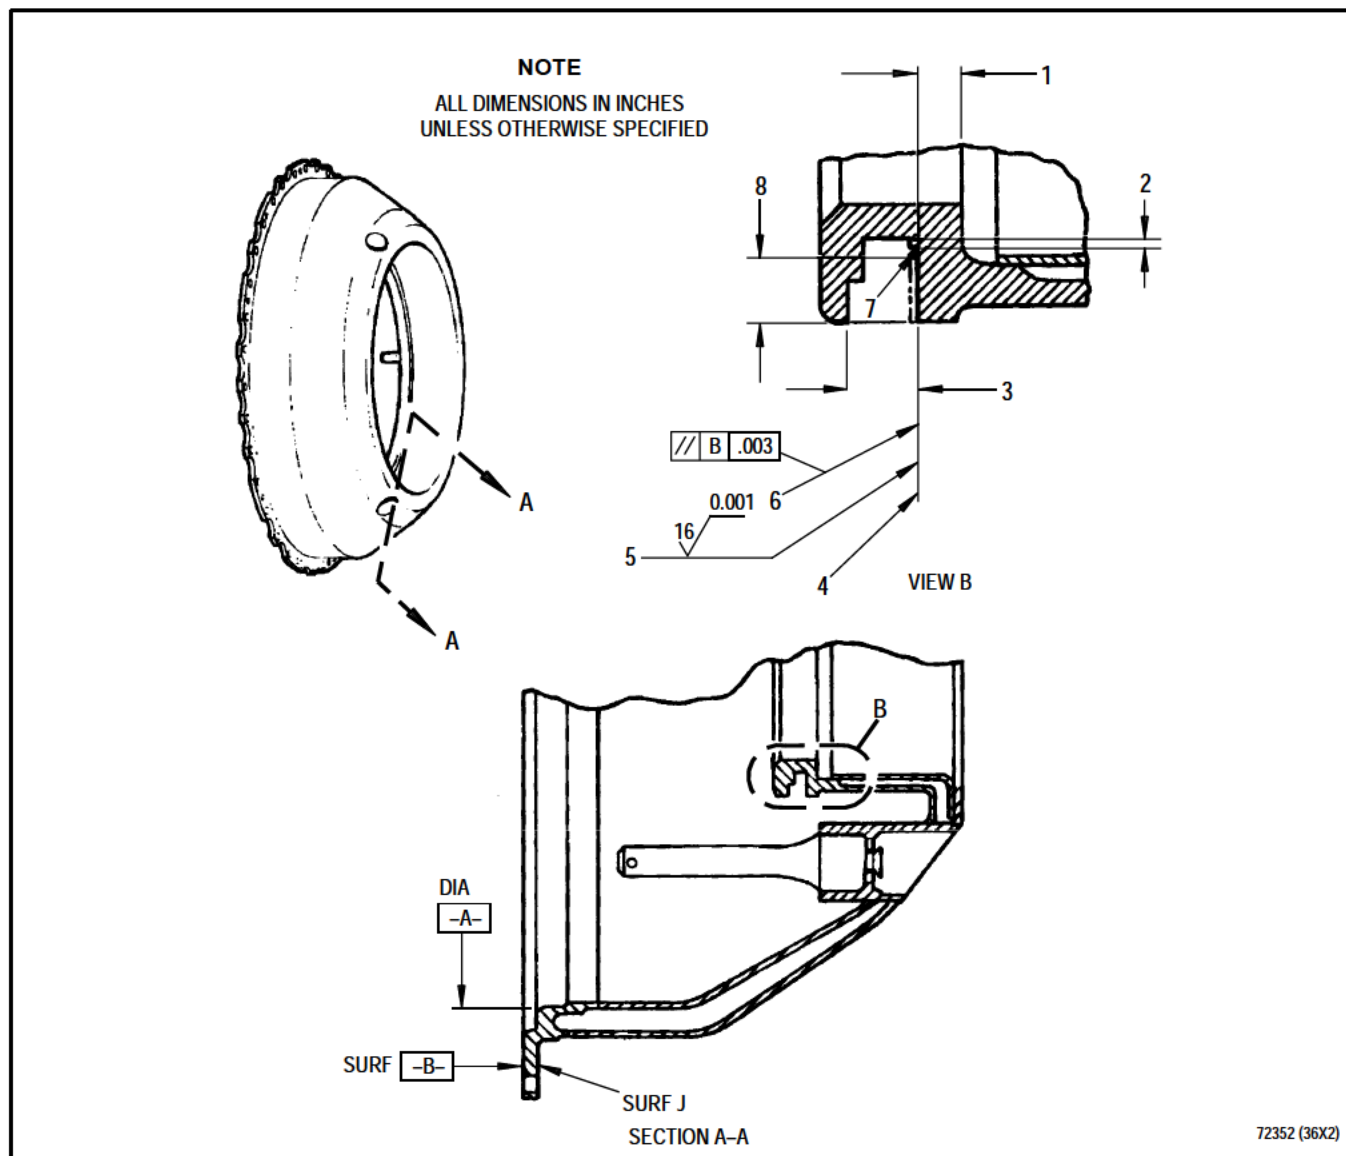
No. 4 Bearing Seal Rear Support Assembly - Seal Ring Groove Repair
